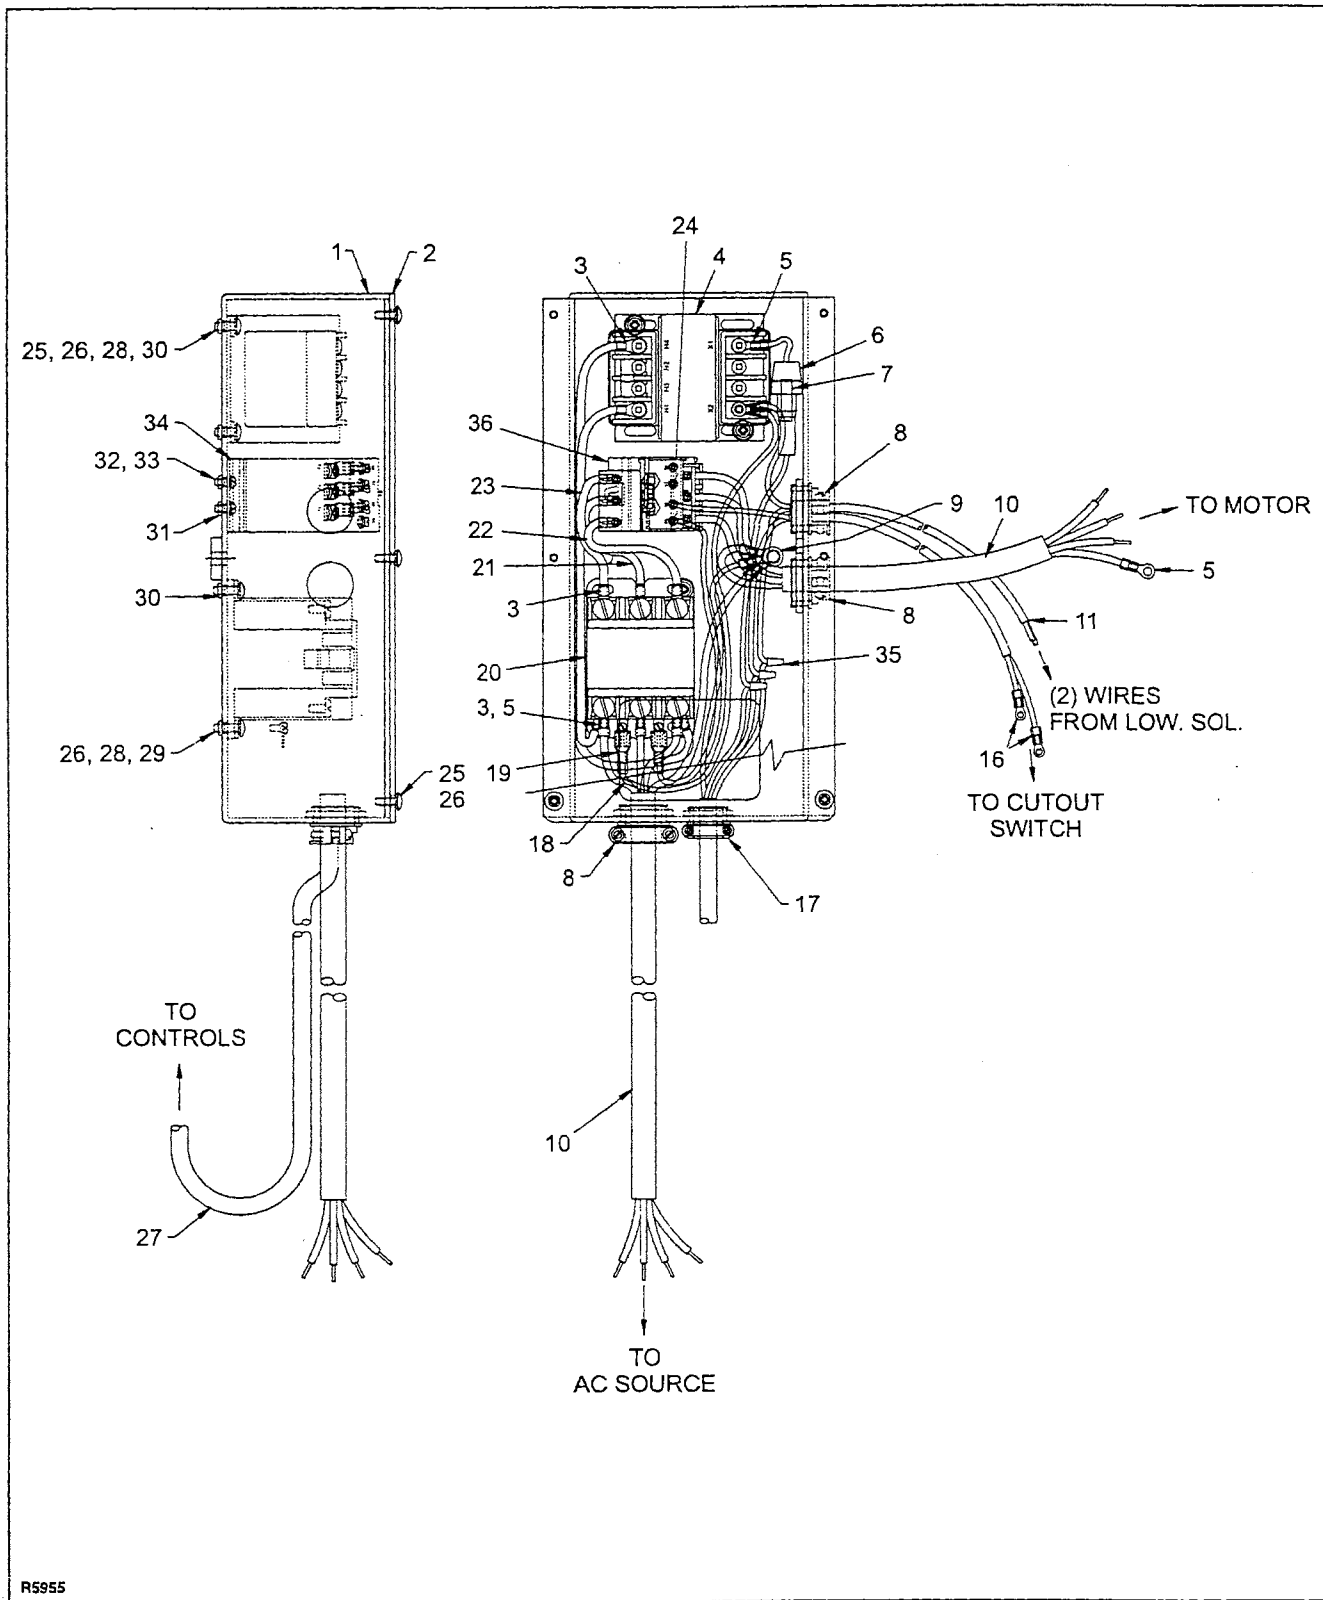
Electrical Box Assembly (36/48/60" Tables)
